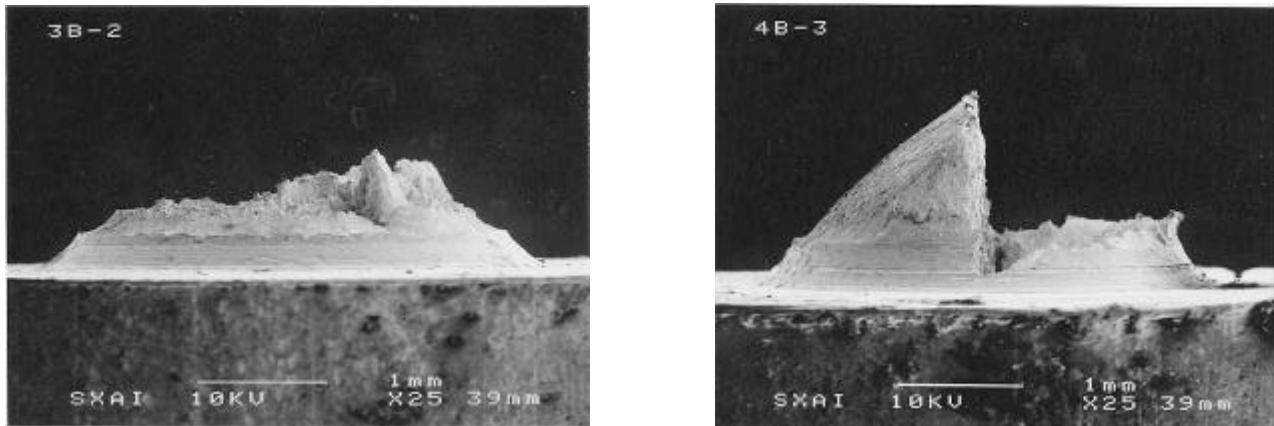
Fracture profile of notch B (maximum depth; minimum radius) and steels 3 (left) and 4 (right).
